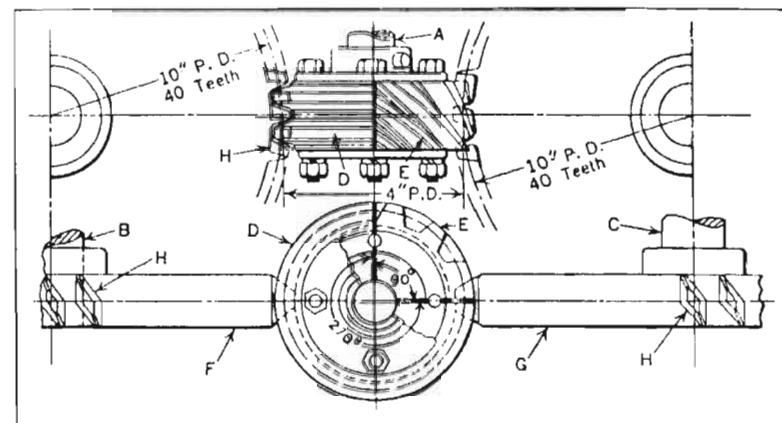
Gear Drive with Special Gears Designed to Have Shaft A Drive Shafts B and C Intermittently
